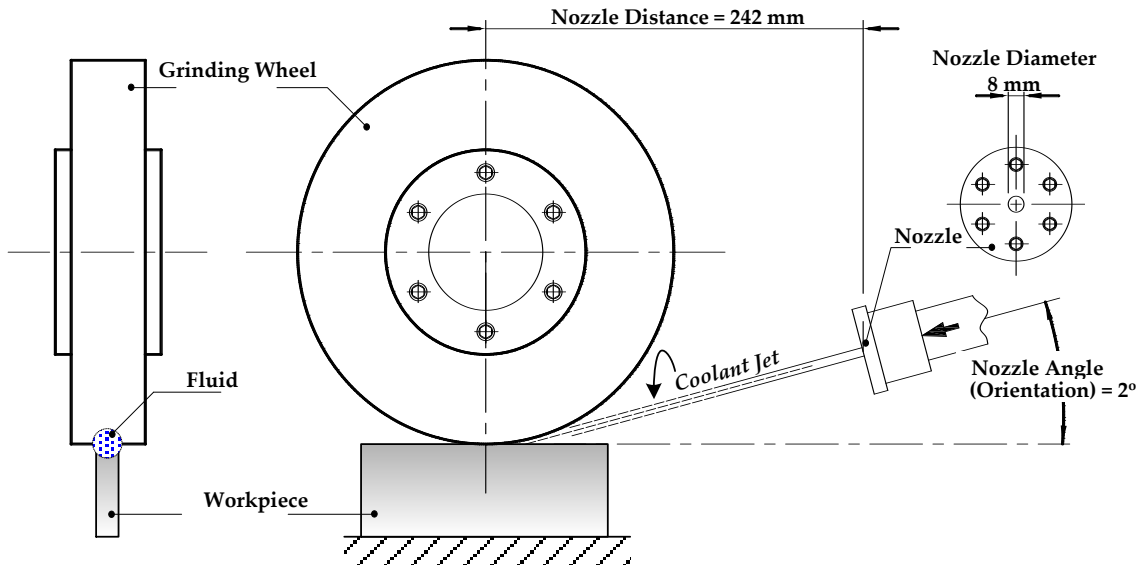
Coolant jet relative position to the grinding wheel & workpiece
